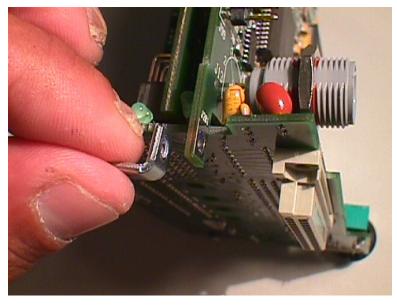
Install L bracket by holding long side; short side connects to Main PCB
